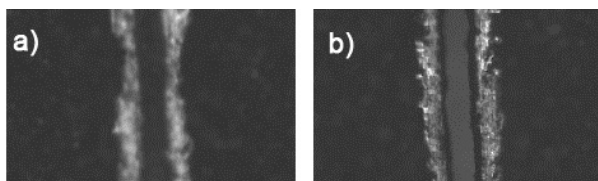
Evolution of laser remote cutting on anode. a) blind groove, b) complete cut.
